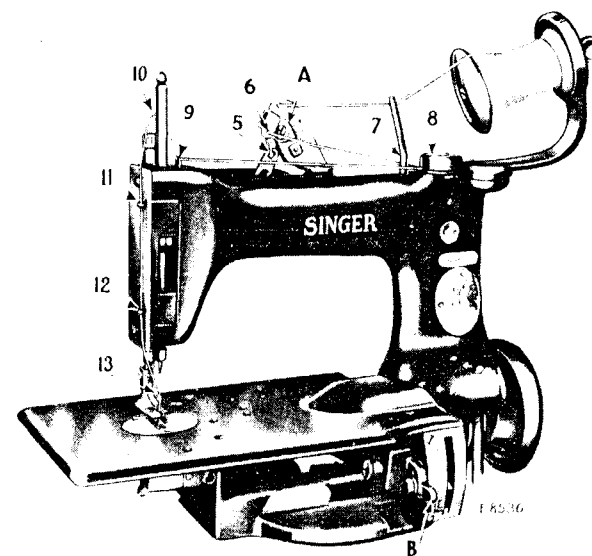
Front View of Machine, Showing Threading To Operate the Machine
